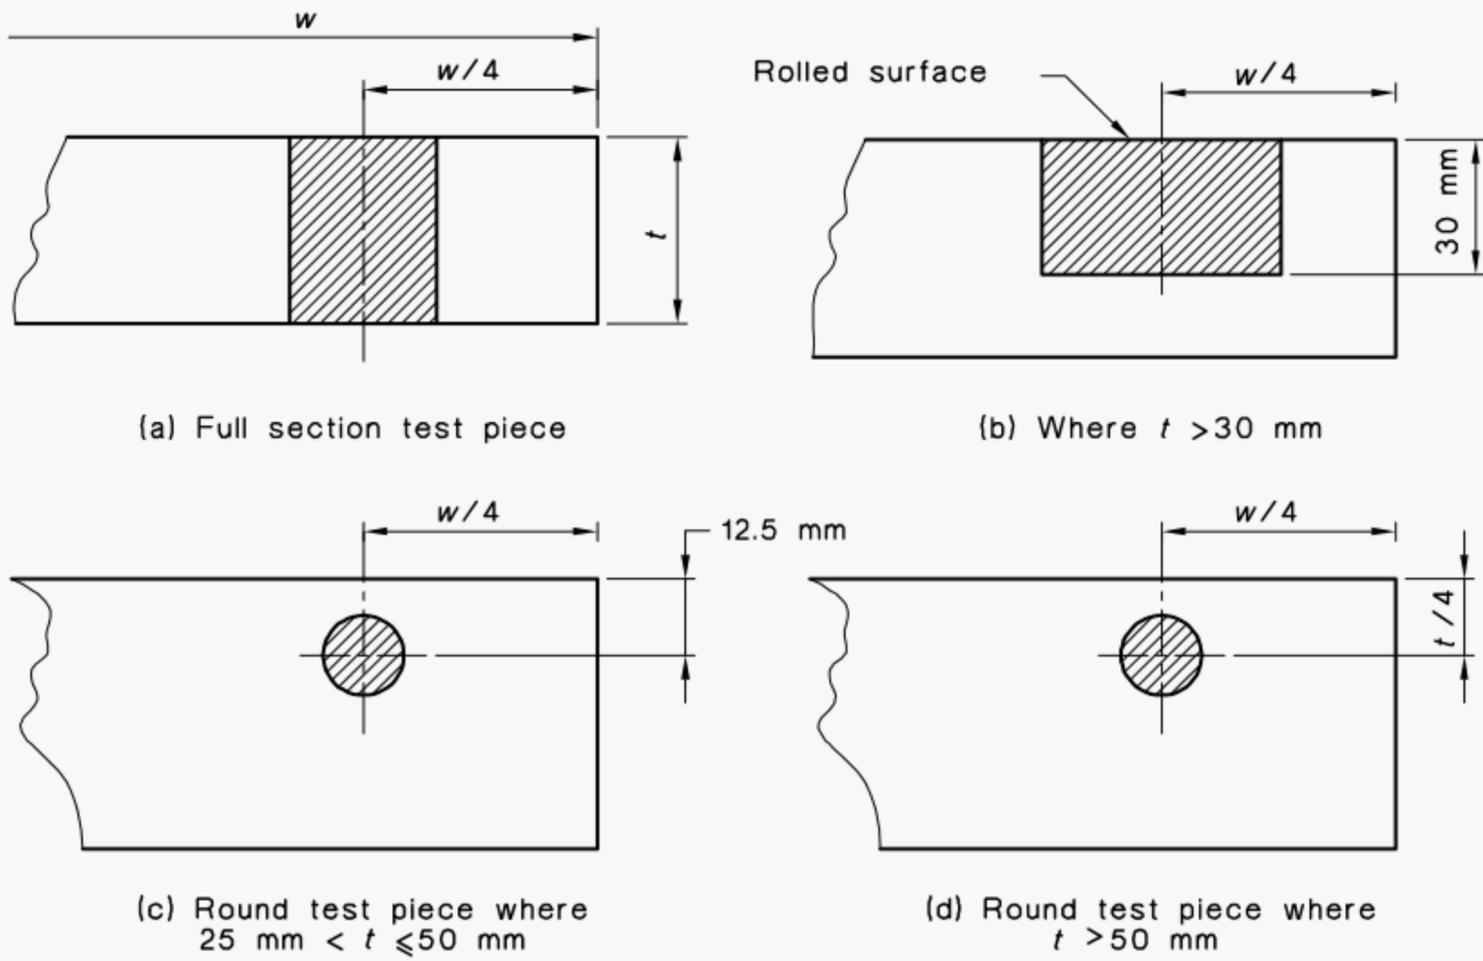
FLAT PRODUCTS—LOCATION OF TEST PIECES FOR TENSILE TESTING
